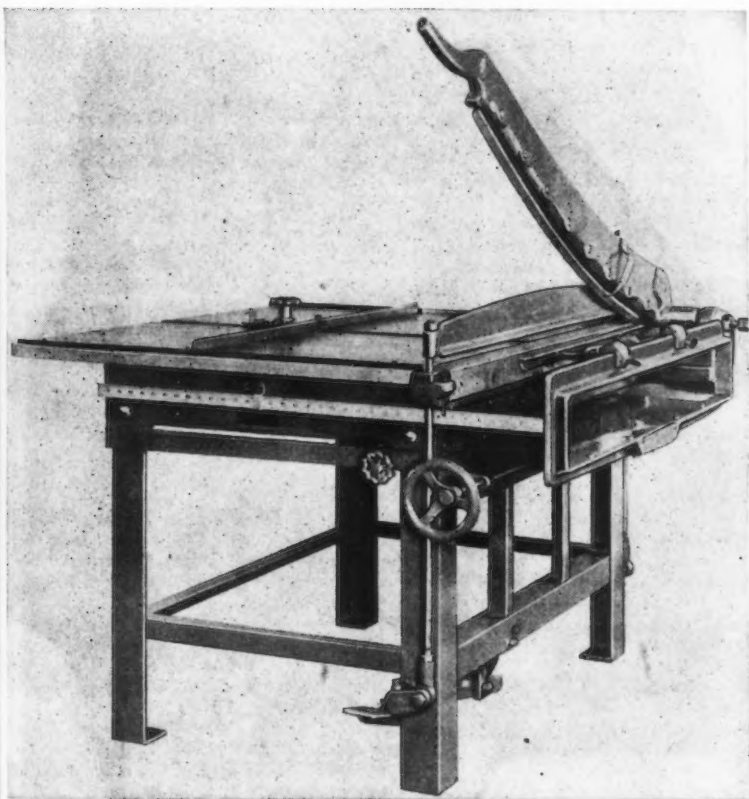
WELDED DESIGN. Hobbs engineers redesigned the shear for fabrication by arc welding. The new machine costs 60% less, weighs two-thirds less and is made by line production methods.
